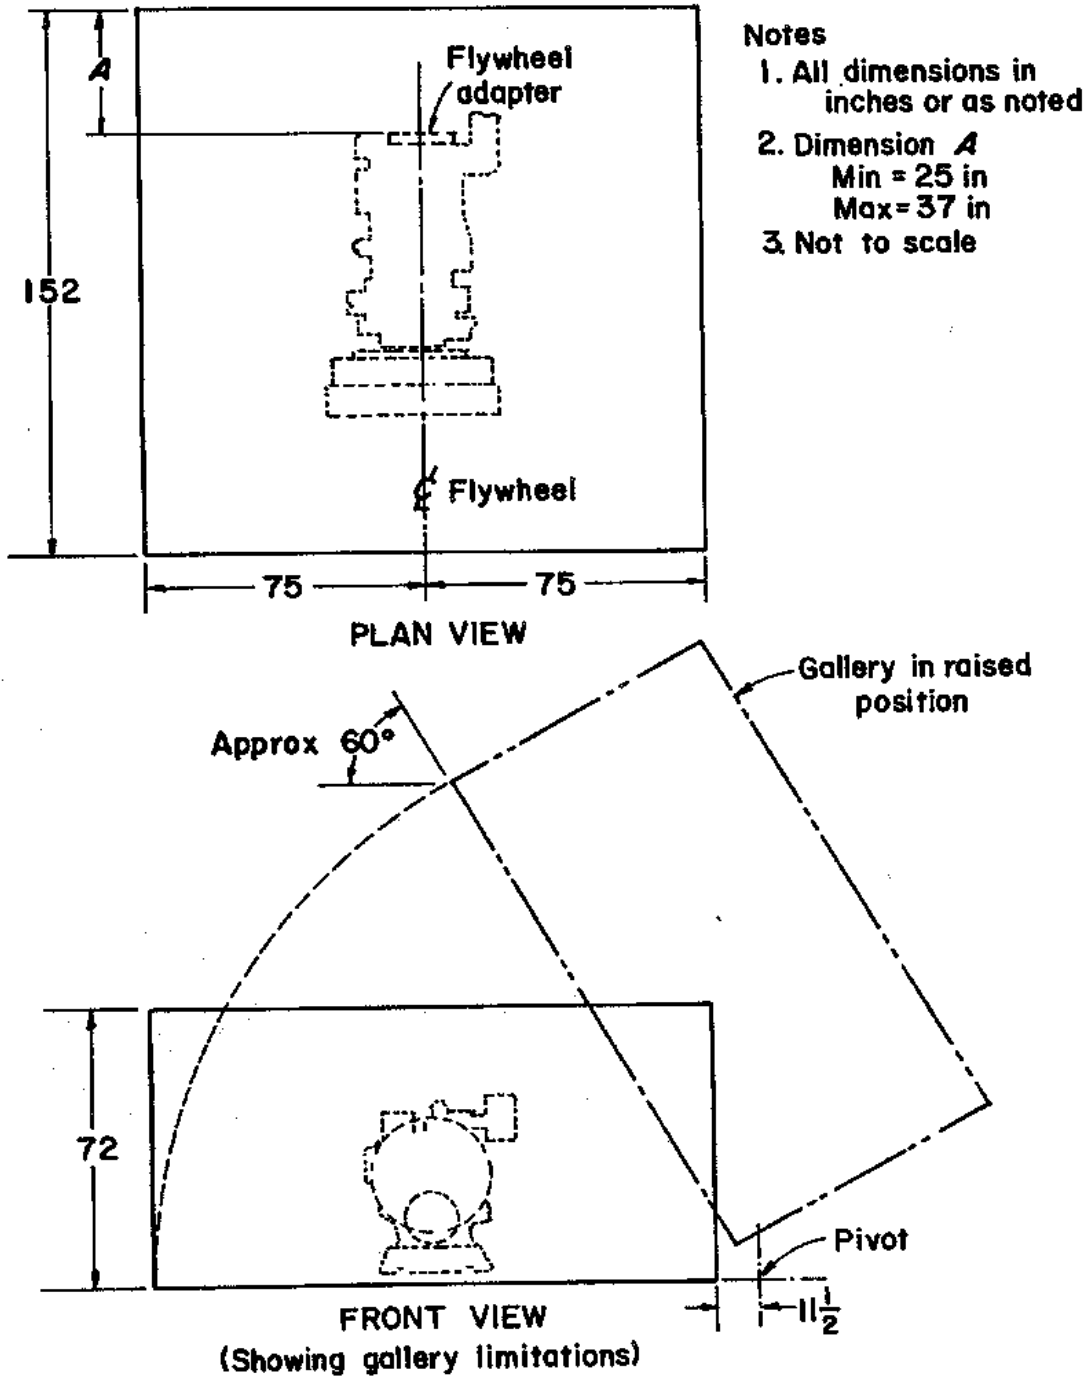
EXPLOSION GALLERY - Dimensional Limitations
